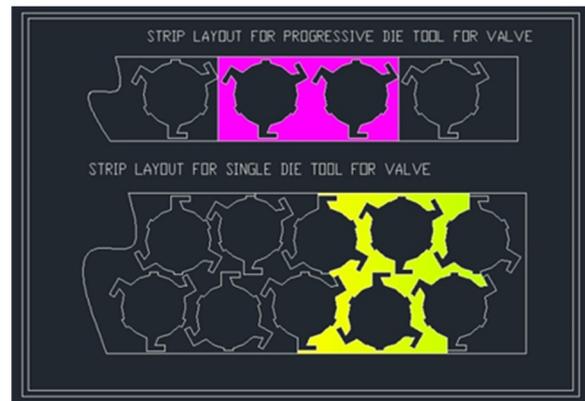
Strip layout for a progressive die & multistage single tool dies for manufacturing Round floating valve.
